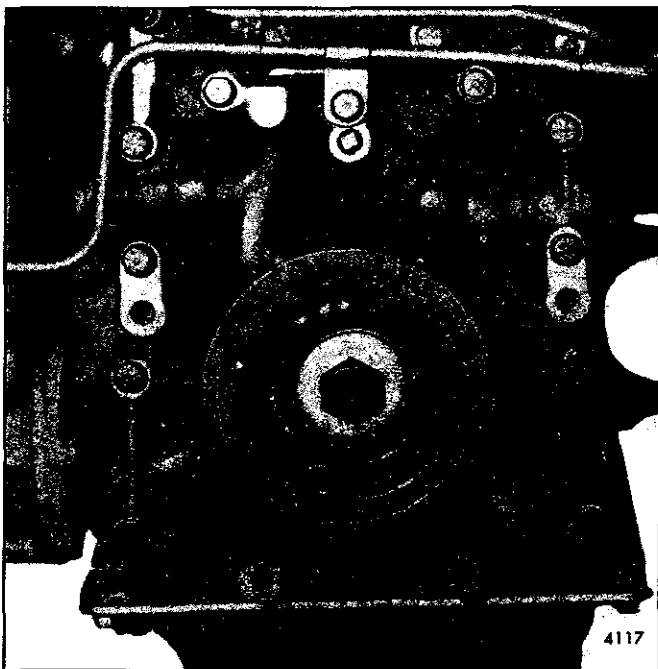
Engine Front Cover Mounting (Lower) —
